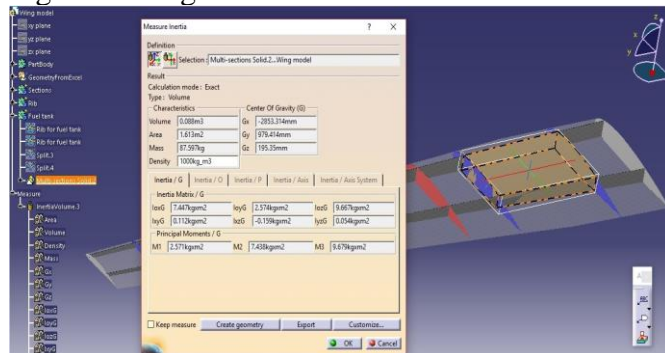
CAD Drawing of fuel systems located on the wing of the UAV.
